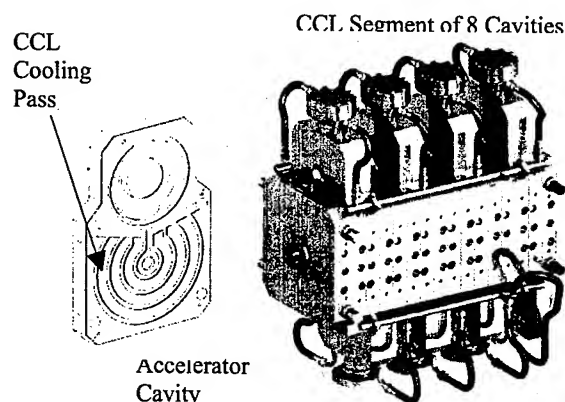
A CCL 8-cell segment with exploded view of the cooling passages
